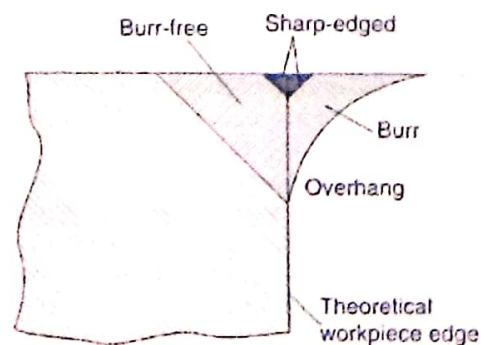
Definition of burrs according to ISO 13715. Reproduced from International Standard ISO 13715. Technical Drawings – Edges of Undefined Shape – Vocabulary and Indications, 2000
